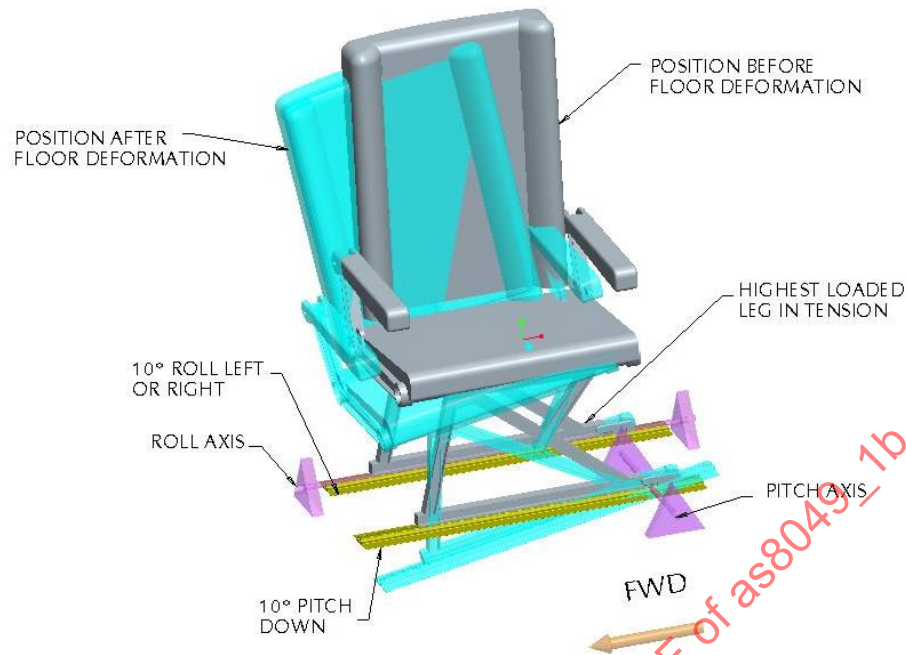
A - Typical floor deformation - single-occupant, side facing seat
